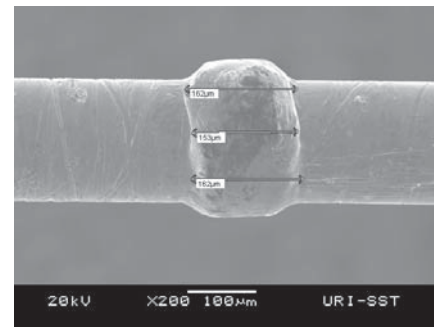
200X magnification demonstrates the uniform butt weld accomplished with .007" (.18mm) diameter Nitonal wire.
